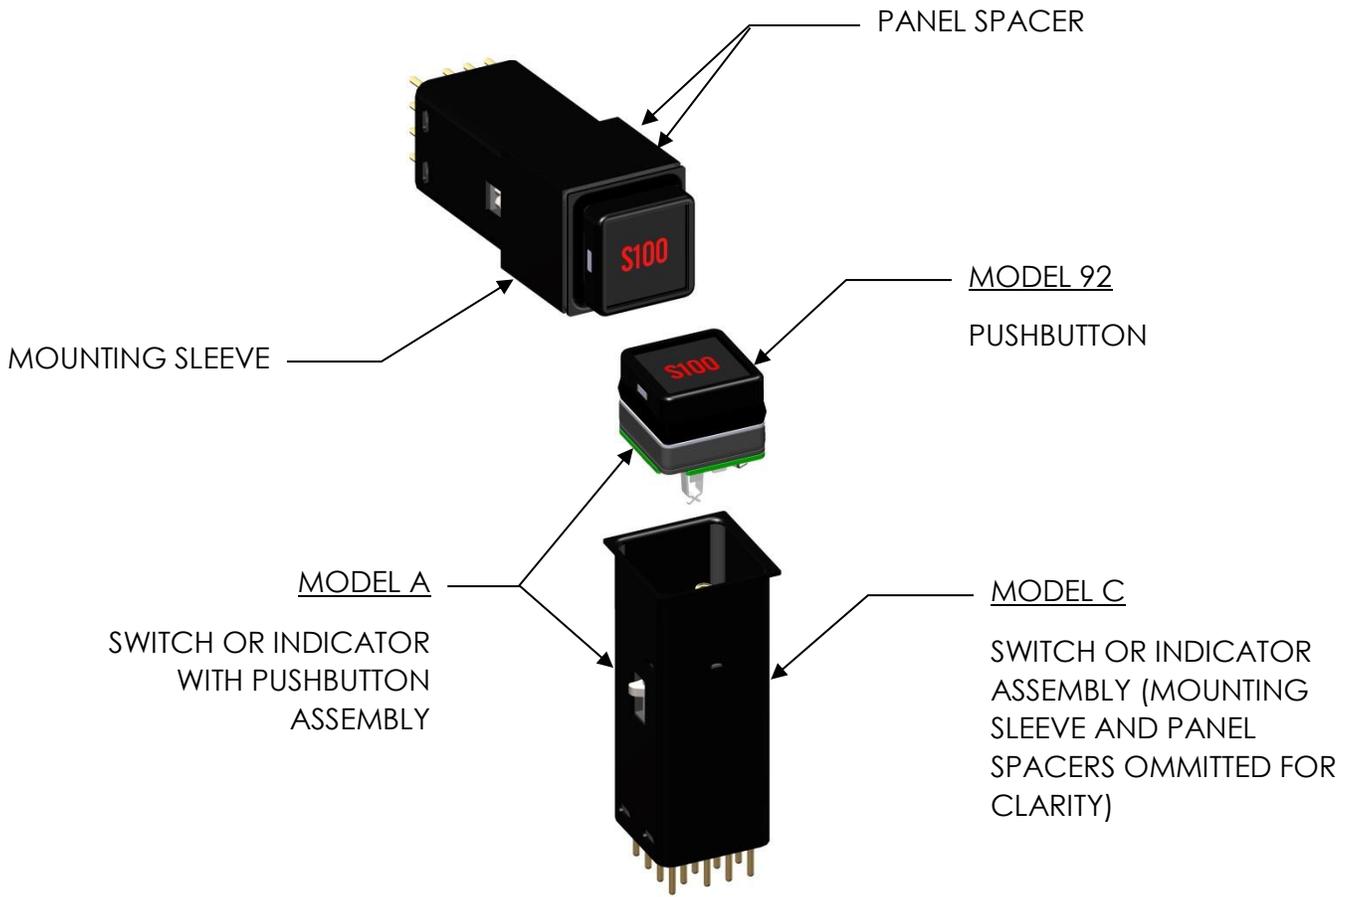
Model A – exploded view - Drip-proof and PC termination version
